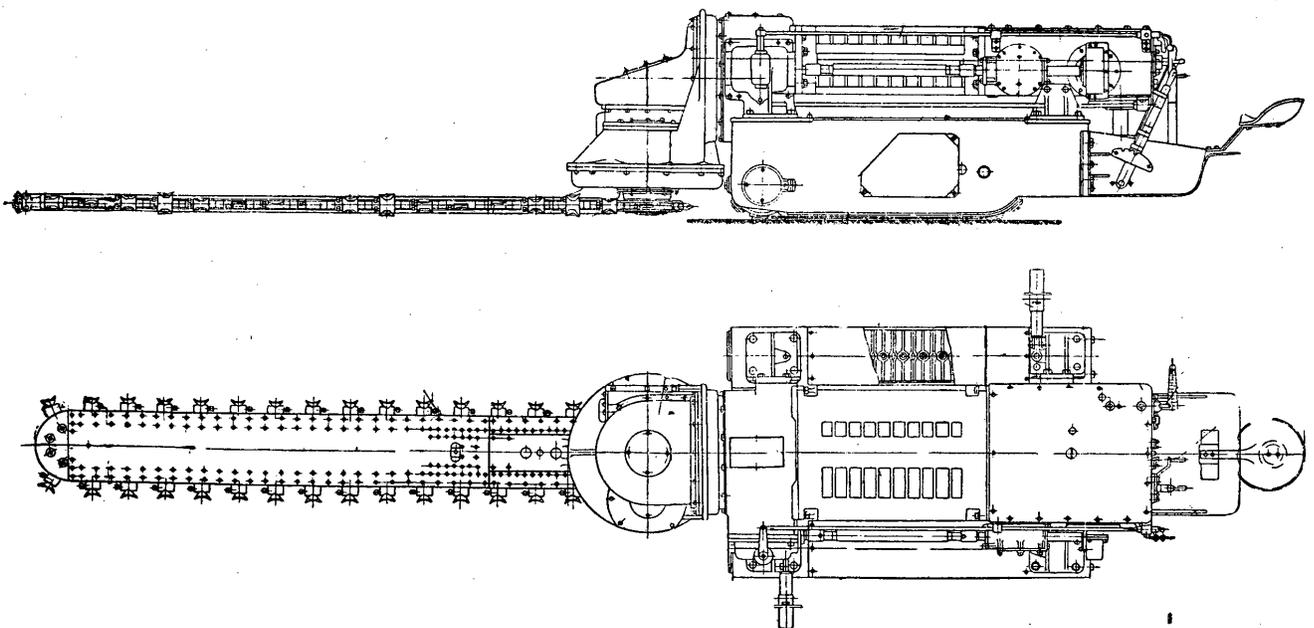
Soviet Universal Coal Cutter, VTU-1.
